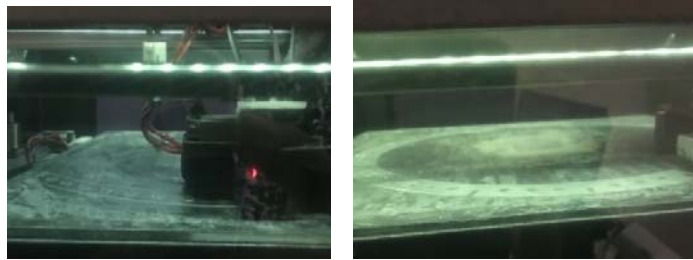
Printing process of basket parts / Printing of guide floor in Zaxe X1 3D 3D printing machine* Image 9. *Printing process of the basket parts on the Zaxe X1 3D 3D printing machine / Printing on the guide floor that will be performed in 10 layers
